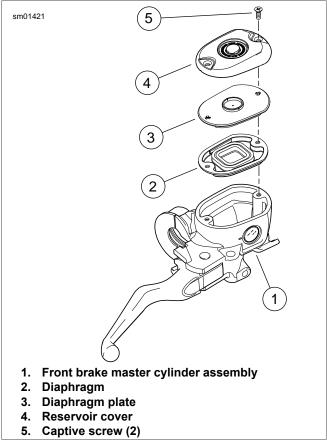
Front Brake Master Cylinder Cover Assembly (typical)
